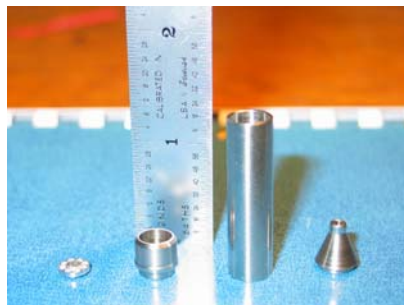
Mini CylinderCan Design Parts (left to right: lid, main body, tube, cable fitting)
